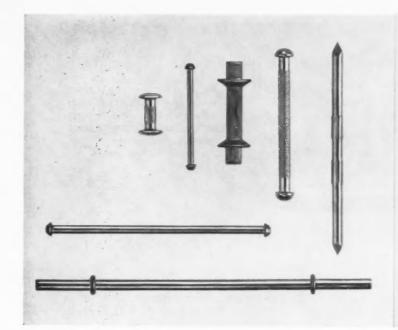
(Left) Both ends of parts made on double-end header are formed simultaneously. Spacers for machine parts and toy axles are among components made in this manner.
